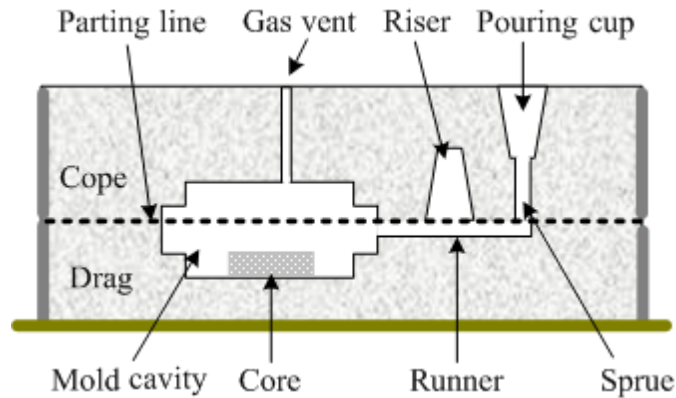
Schematic Set-up of Sand Moulding / Casting Process (John A Schey, 2000)
